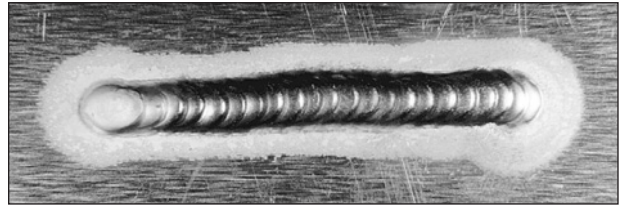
Aluminum TIG Weld. Note bright area where oxides have been removed through cleaning action of the arc.
